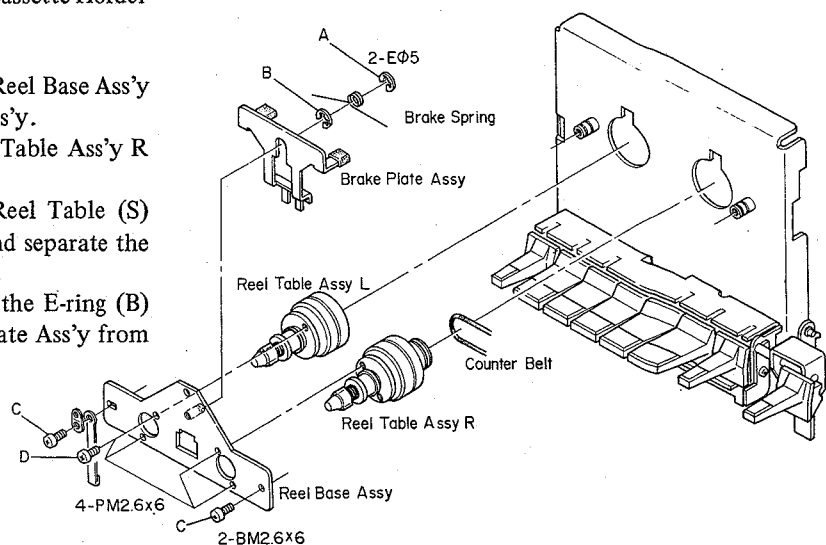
Reel Tables and Brake Plate Ass'y
